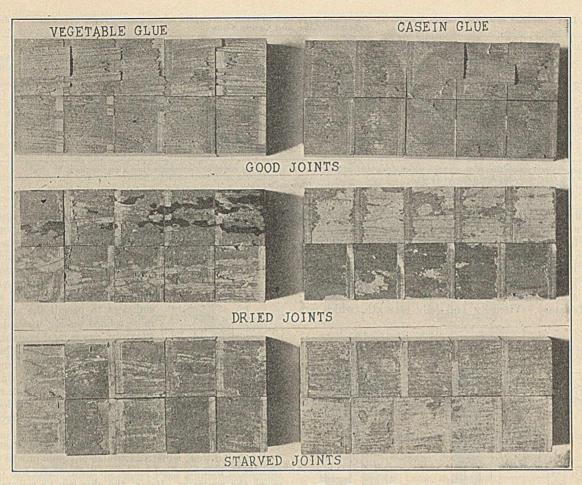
Appearance of Fracture in Broken Test Specimens of Three Types of Wood Joints Made with Vegetable and Casein Glues
